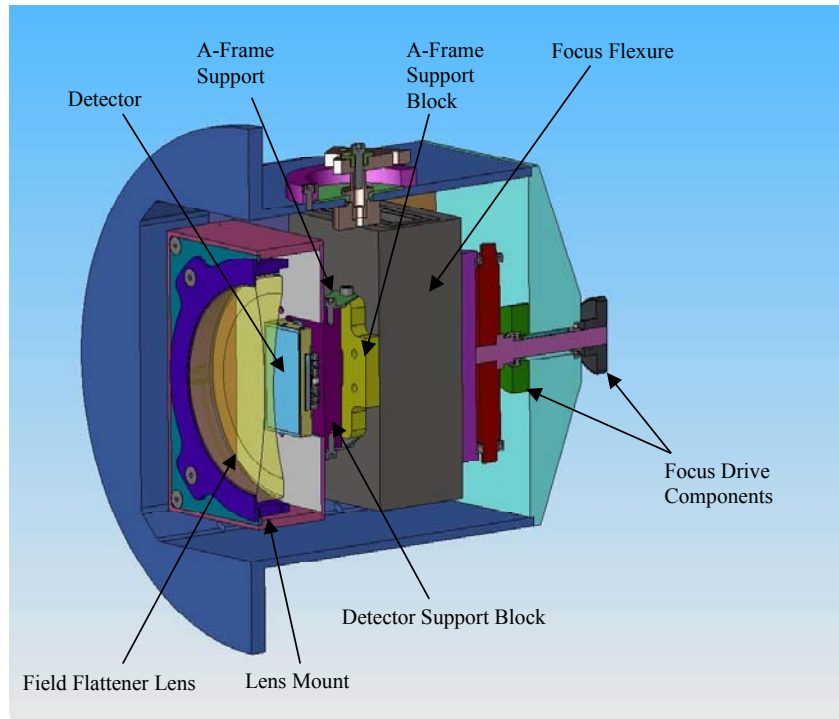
Detector Head Cut-away View Showing the Field-flattening Lens and Focus Mechanism.
